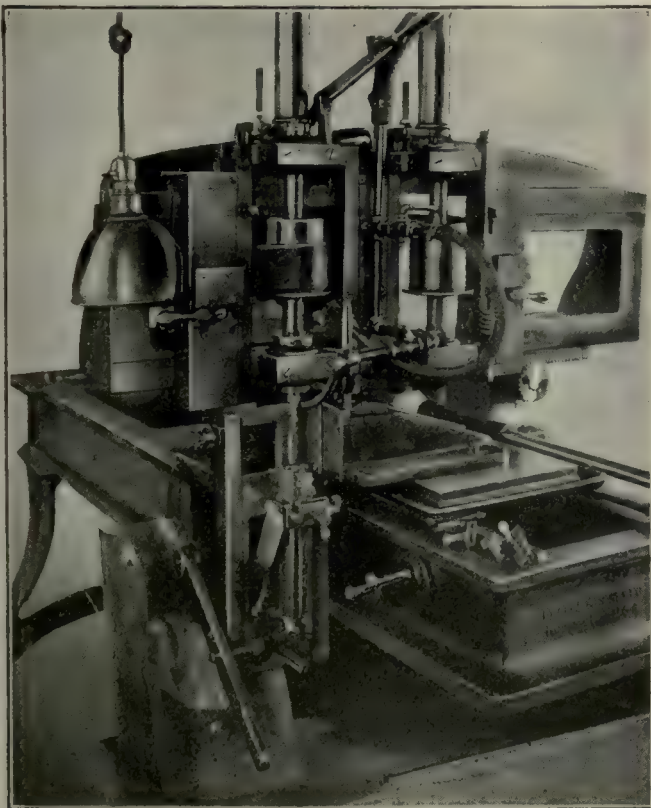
RECUTTING EXTRACTOR CLEARANCE
